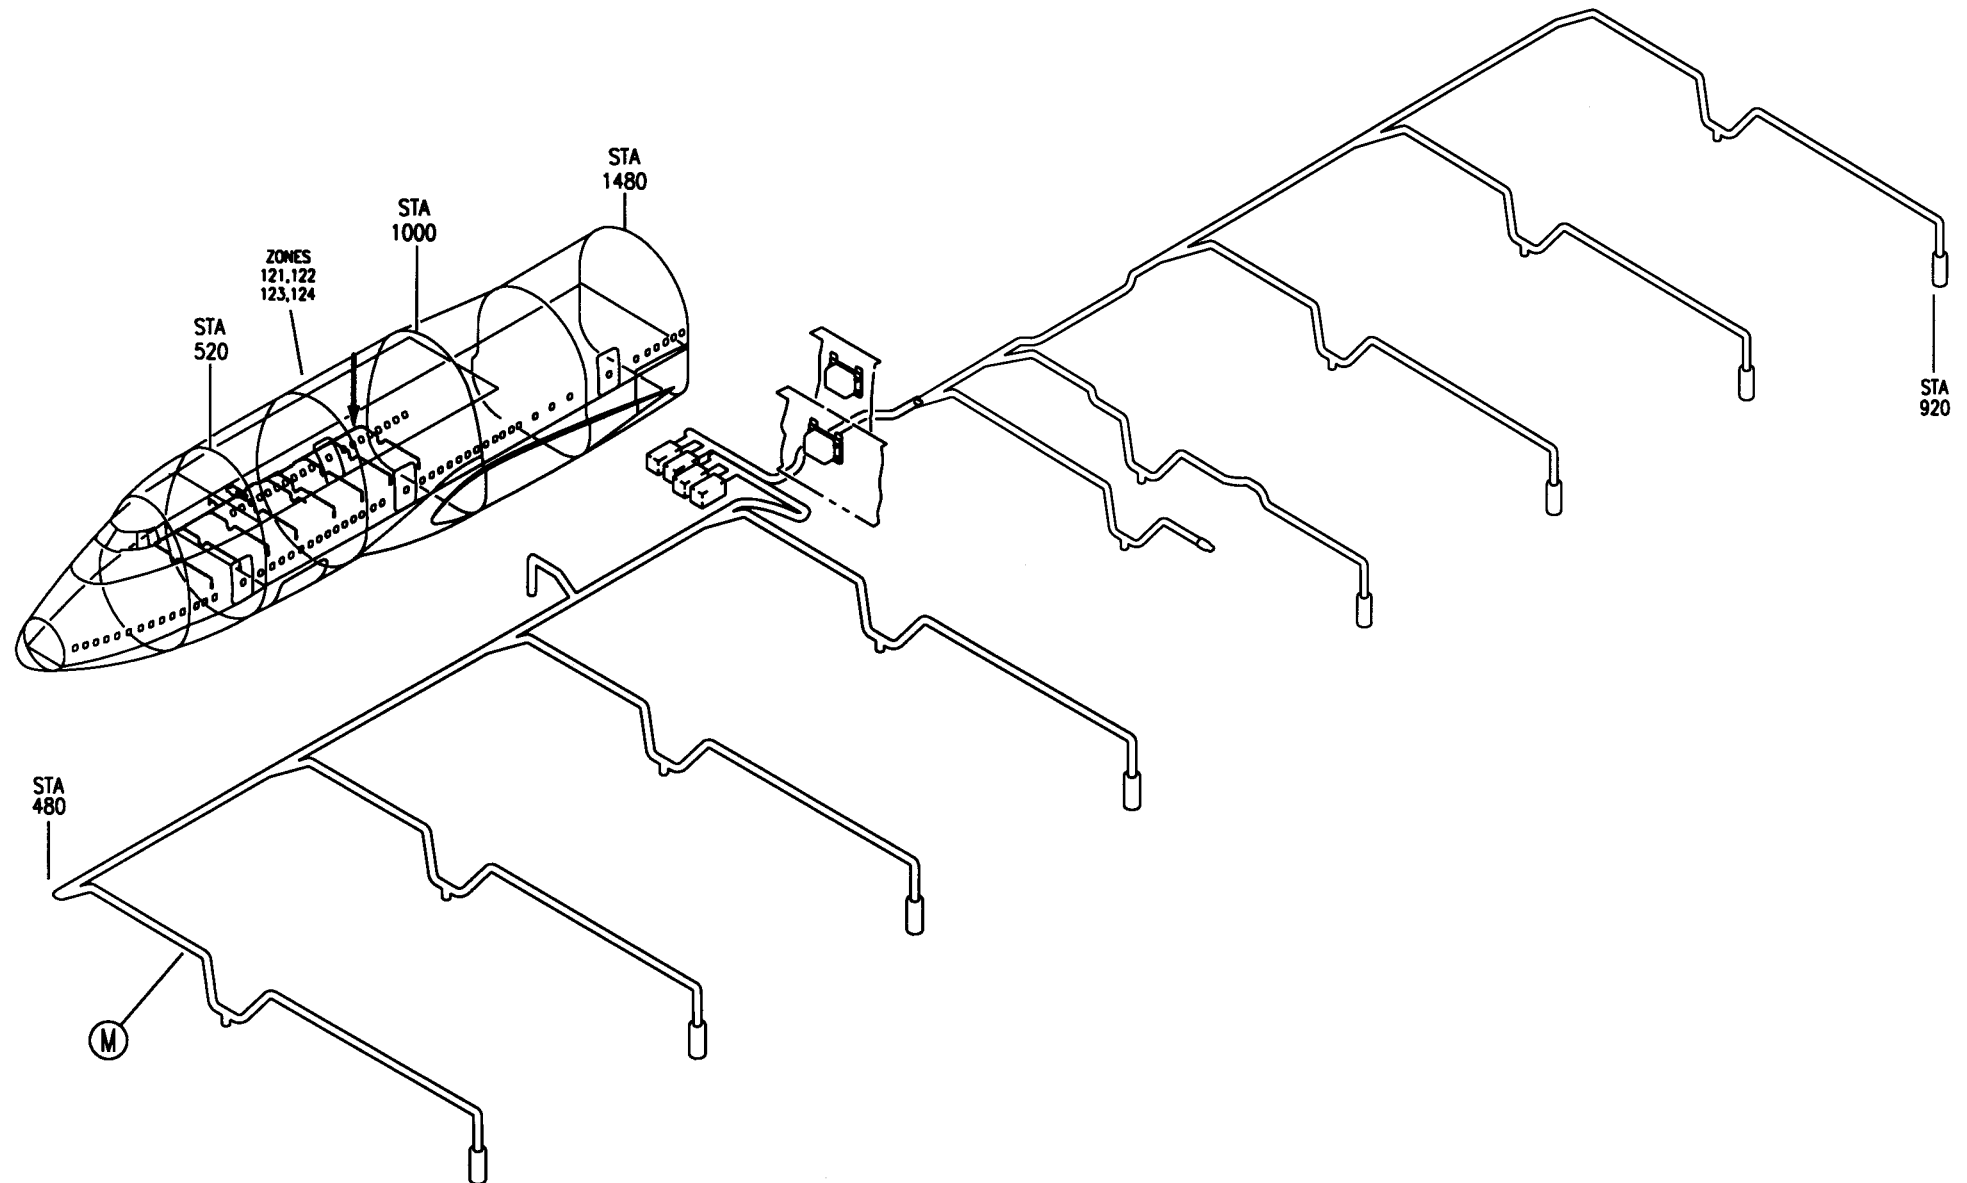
TUBE HEARING COMPONENT LOCATION FWD CC
